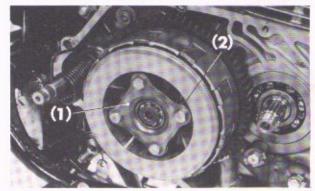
(1) Clutch lifter plate (2) Clutch spring
